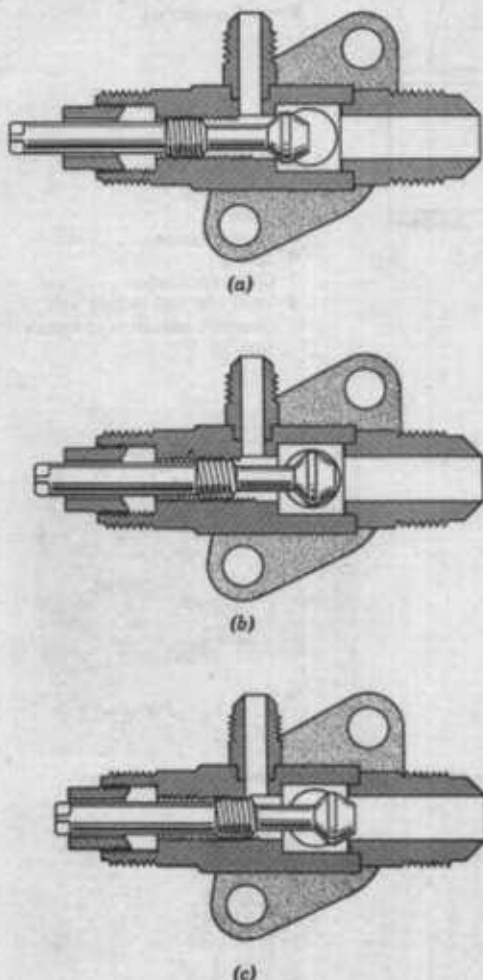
Compressor service valve. (a) Back-seated. (b) Intermediate position. (c) Front-seated.
